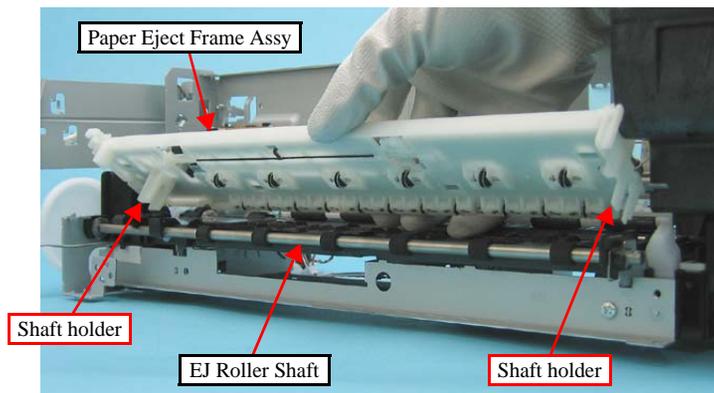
Installing the Paper Eject Frame Assy (1)
